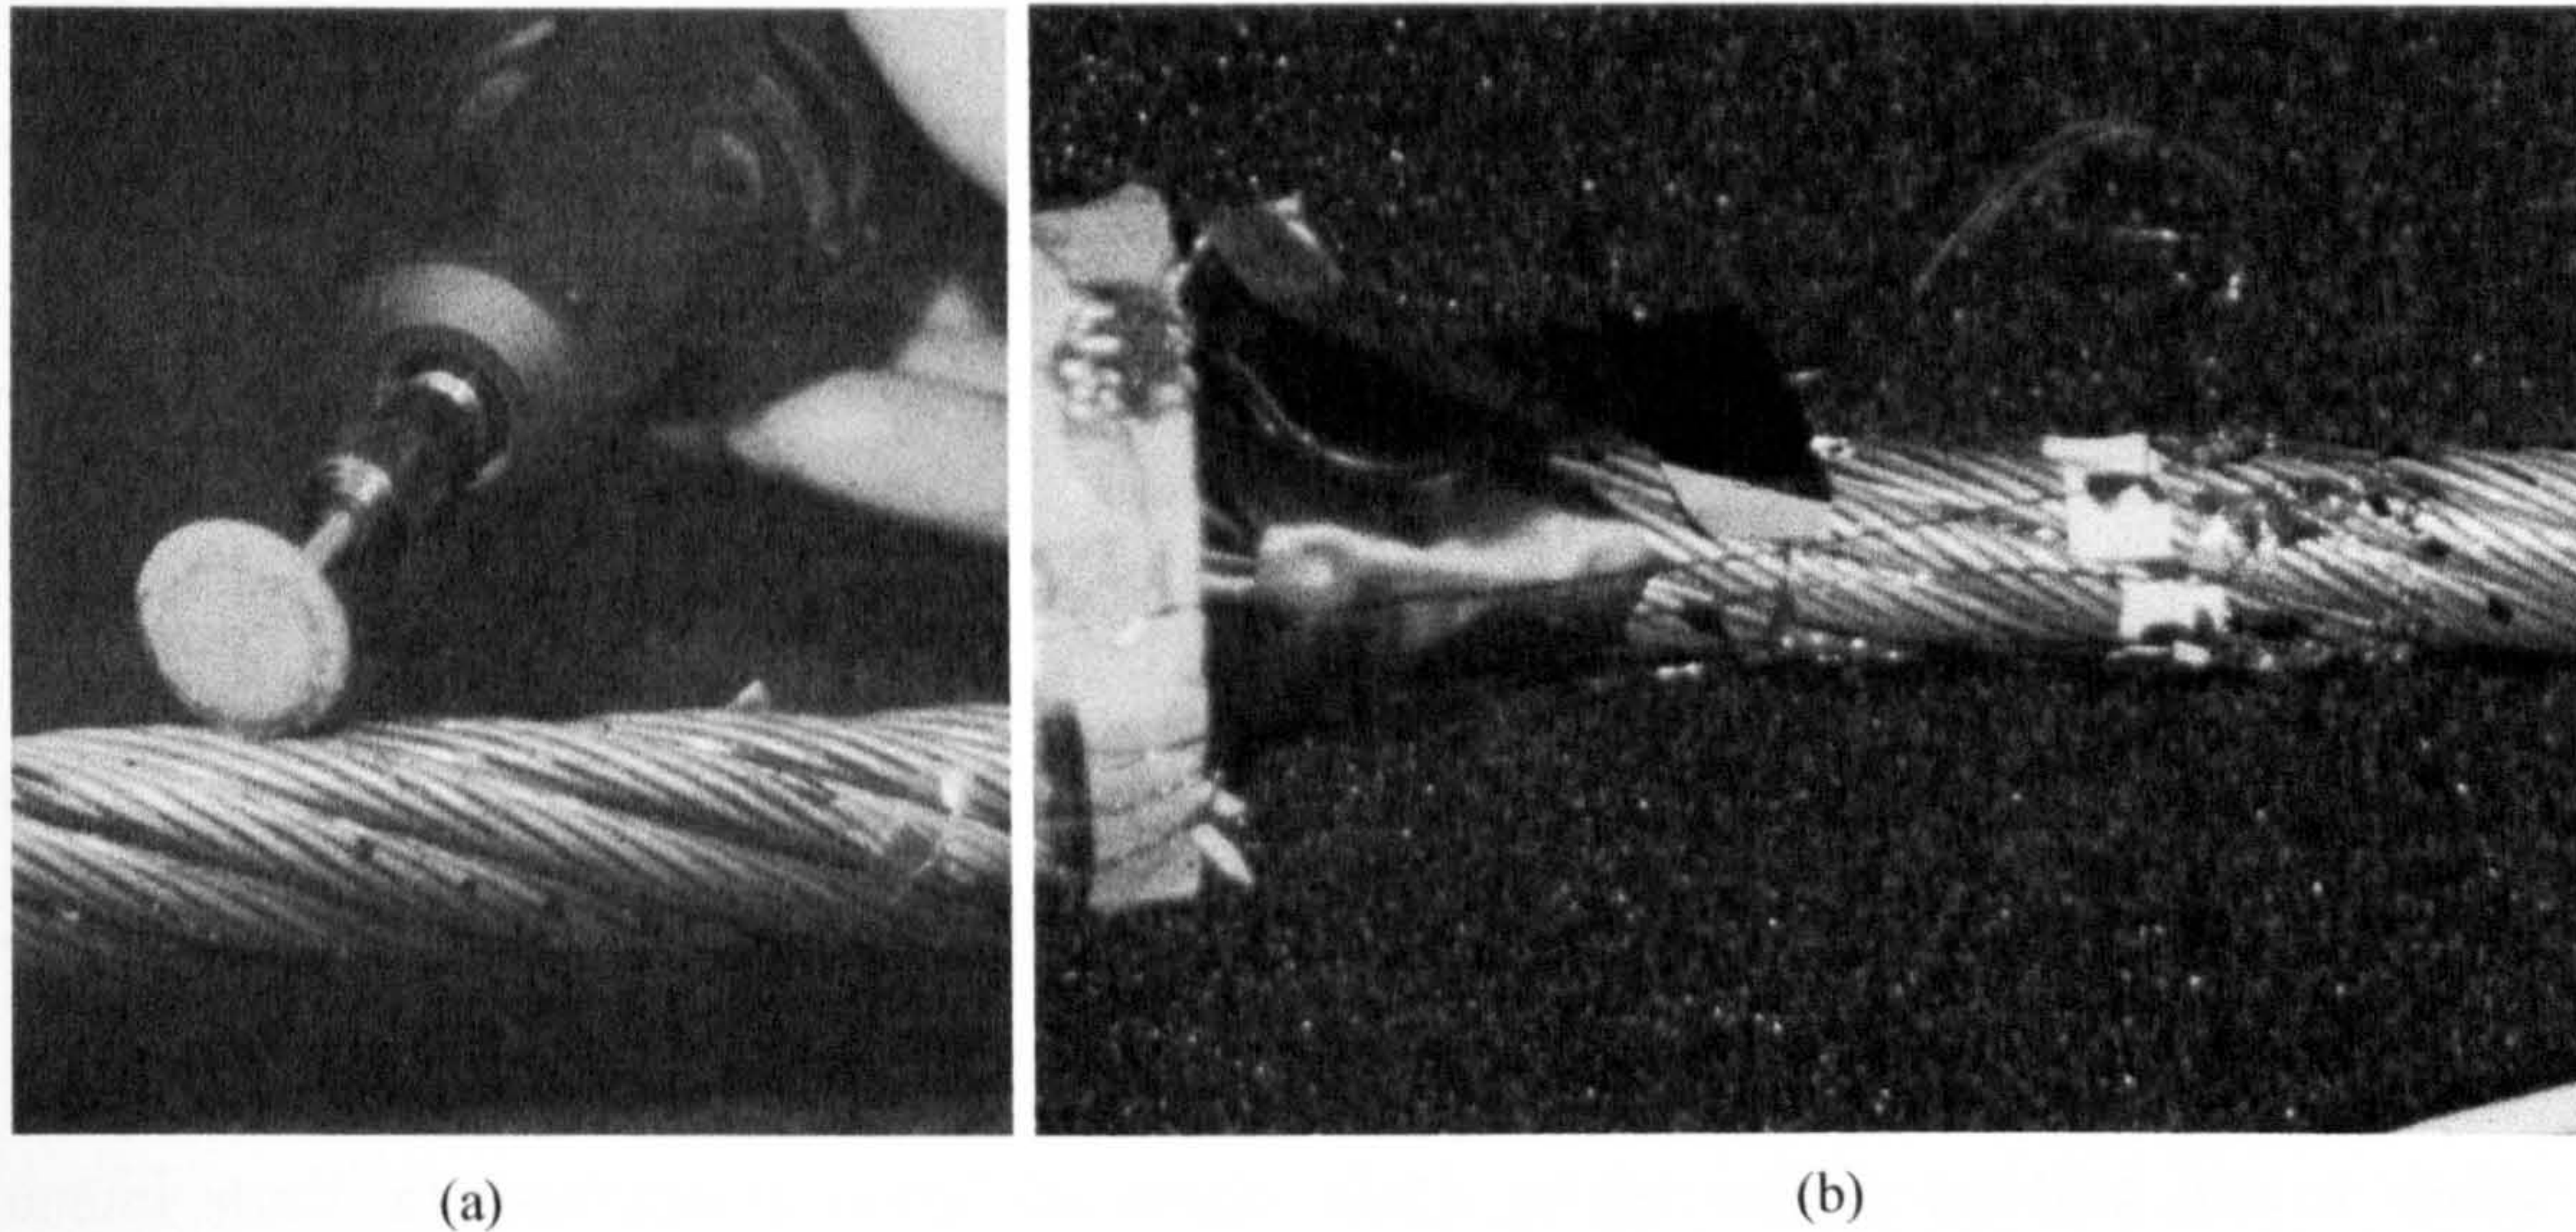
(a) The technique for introducing wire breaks (b) The wiring of the strain gauges.
